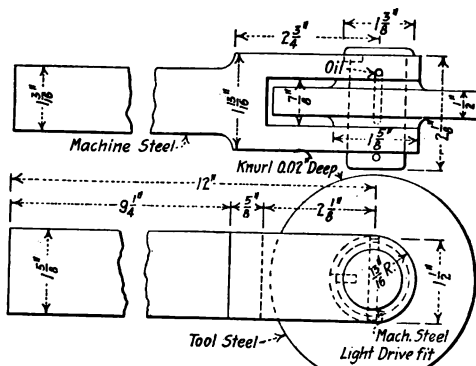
THE KNURLING TOOL FOR CHANNEL
